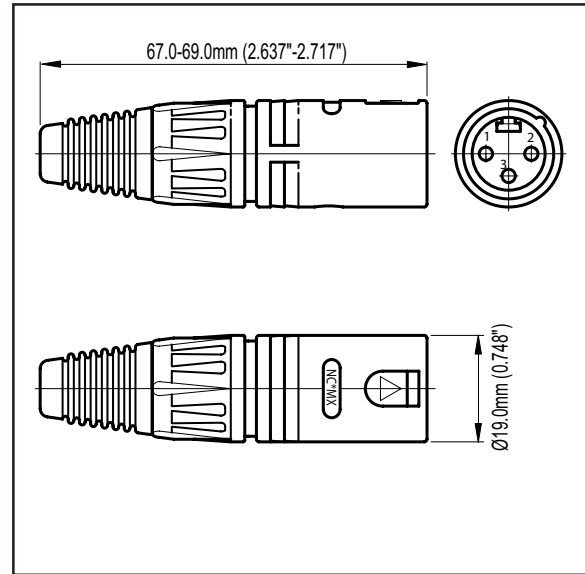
Outline drawing and dimensions for male XLR connector used on DC-I50/XLR and DC-I100/XLR signal cables.
